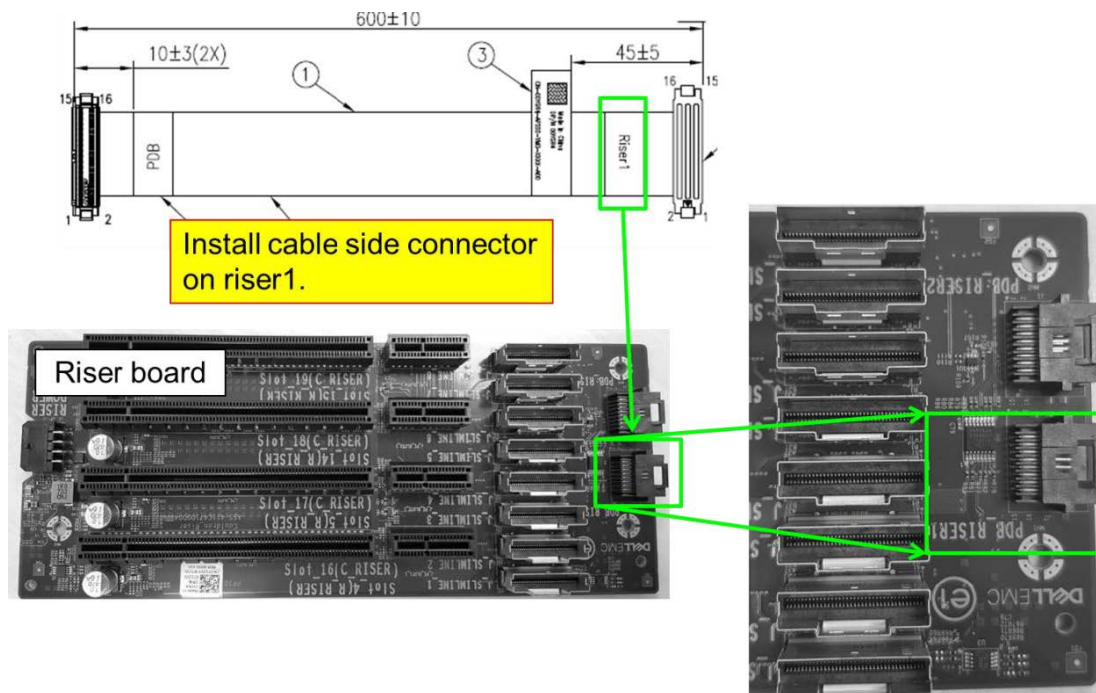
IDC cable Riser1-PDB assembly to riser board1
